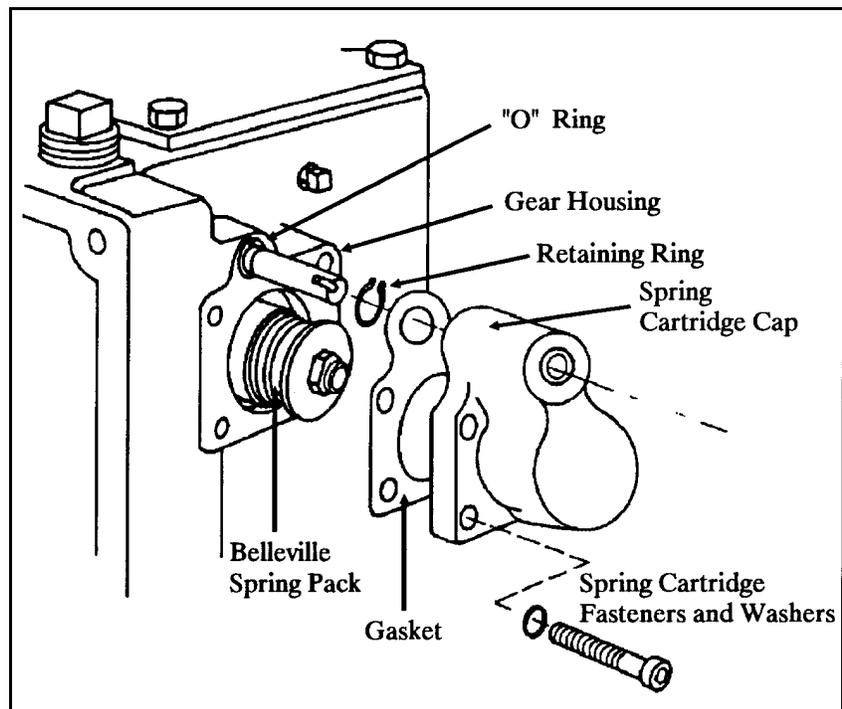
Worm/Belleville Spring Pack Installation
